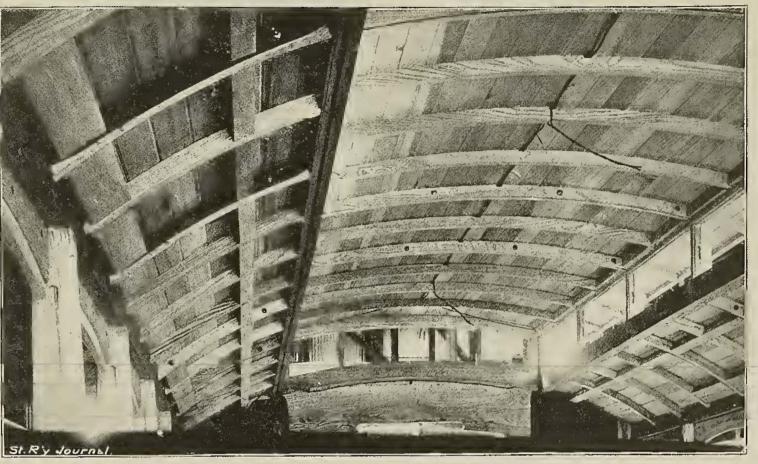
INSIDE FRAMING OF ROOF. (J. G. BRILL CO., 1895)
